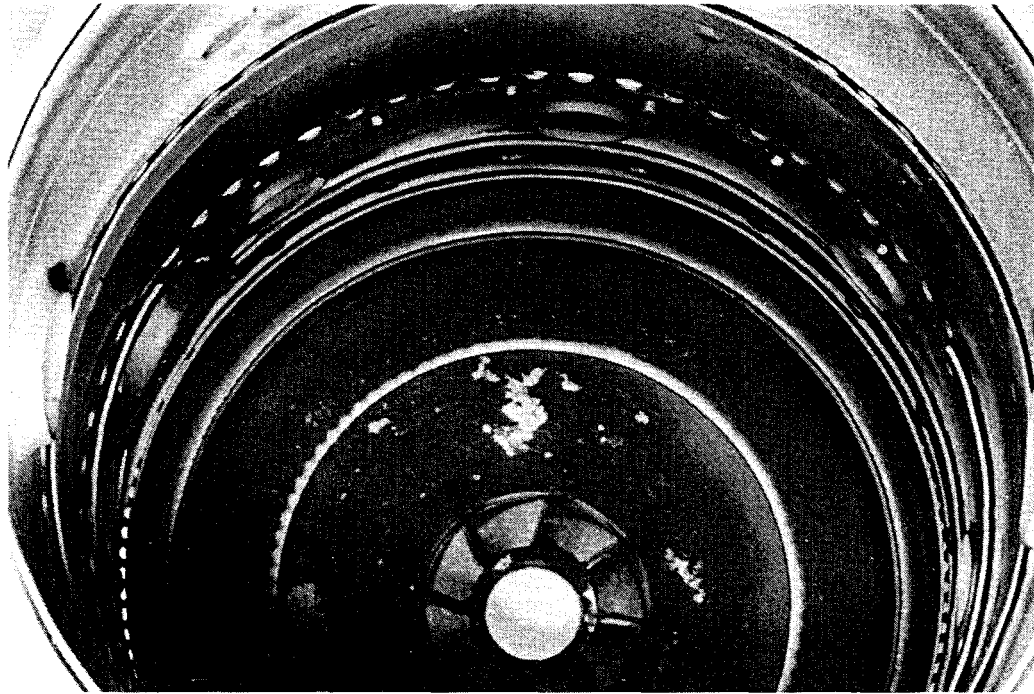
INSIDE OF COMBUSTION CHAMBER, SHOWING REMAINS OF RIVETS WHERE THE 2ND SPLASH COOLING RING HAS BECOME DETACHED
